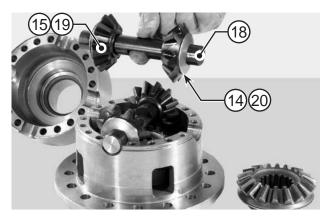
Remove shafts (18), complete with planetary gears (15, 19) and spherical shoulder washers (14, 20).
